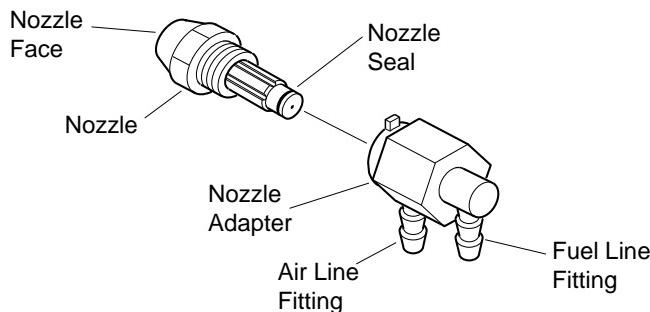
Nozzle and Nozzle Adapter, 35 Model
